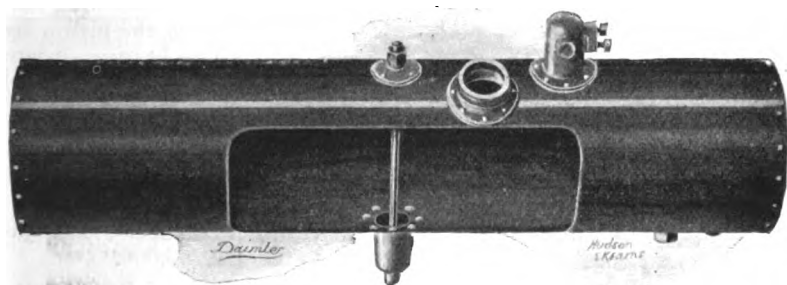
PART-SECTIONAL VIEW OF PETROL TANK.
